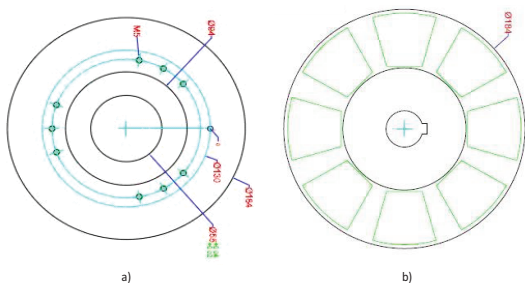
(a) Moving disc, and (b) rotor drawings of EASM motor.
